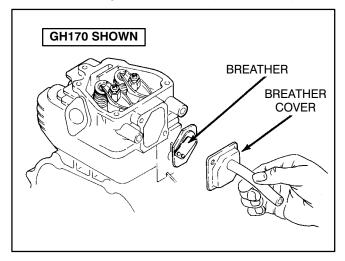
HEAD COVER AND BREATHER REMOVAL
